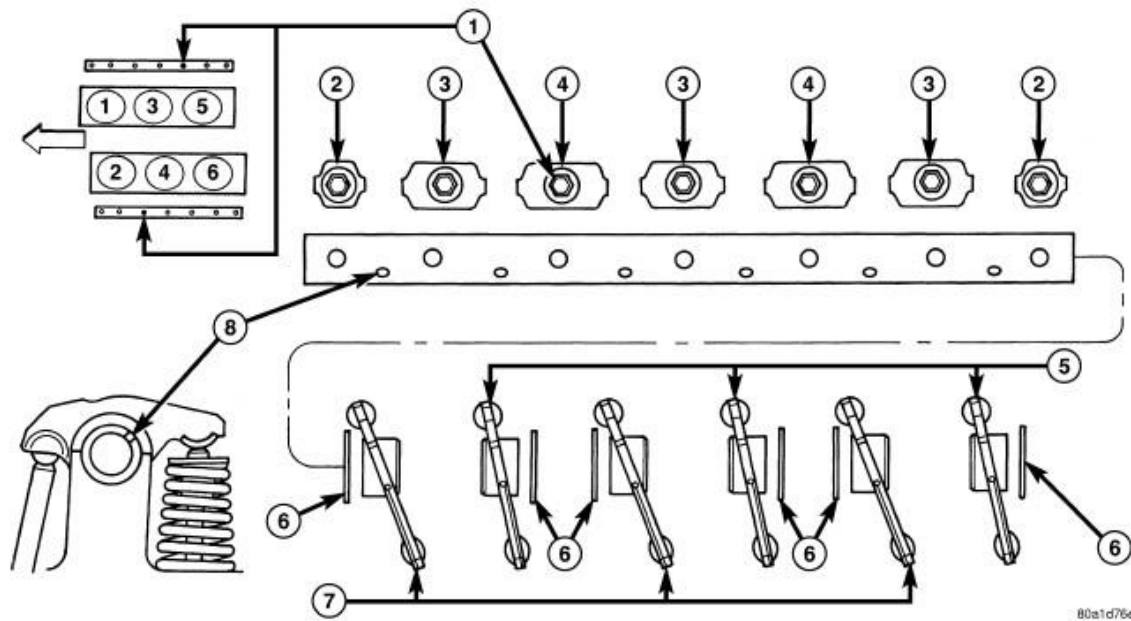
Rocker Arms & Shaft Assembly Positioning
